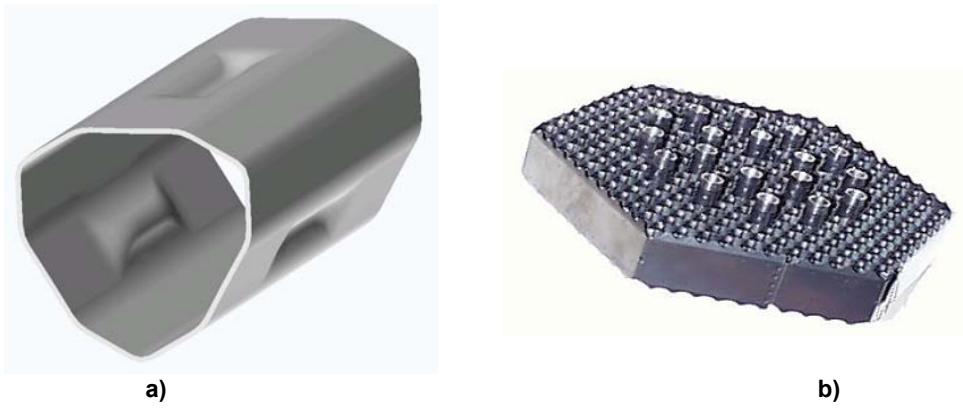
E-type cell (a) and spacer grid with welded guide channels (b)
